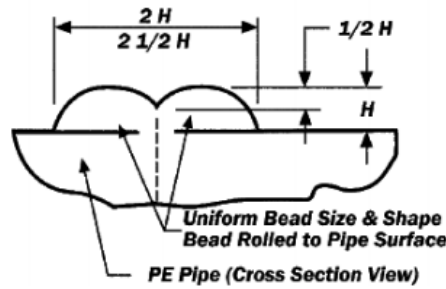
Butt Fusion Bead Dimensional Guideline (ASTM F2620-06)
